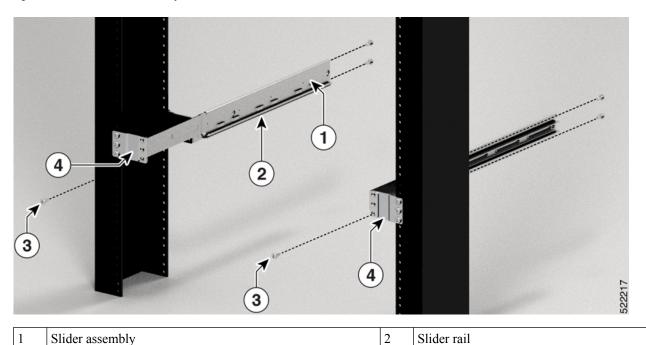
Rack-Mount Slider Assembly on a 23-inch 2-Post Rack
